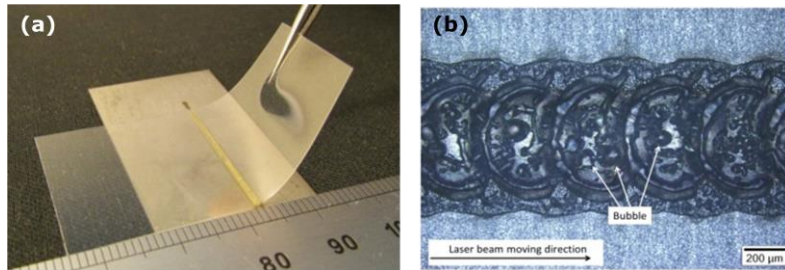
Laser lap welded of PET film to stainless steel (a) and a micro image from top view of the weld (b).
